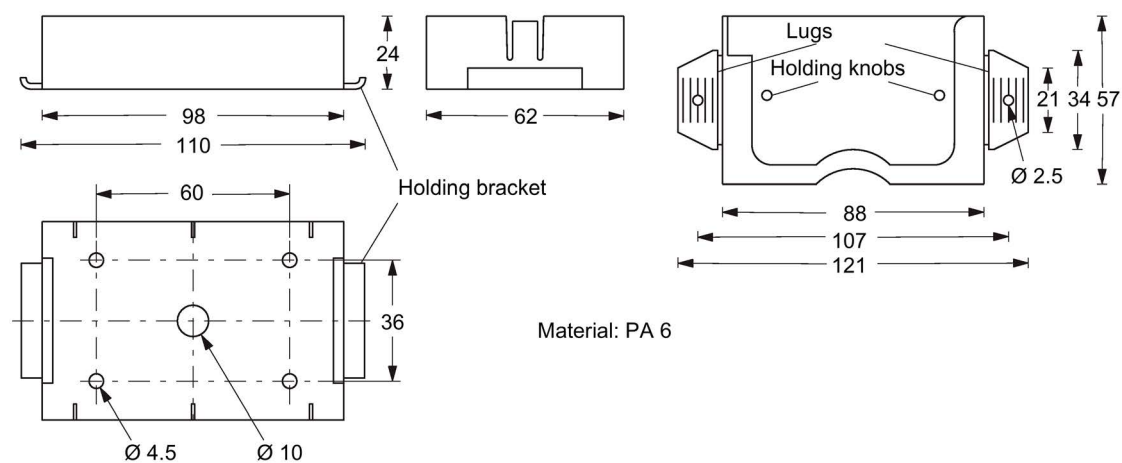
Dimension drawing of spacer 6GT2190-0AA00 with fixing pocket 6GT2190-0AB00
